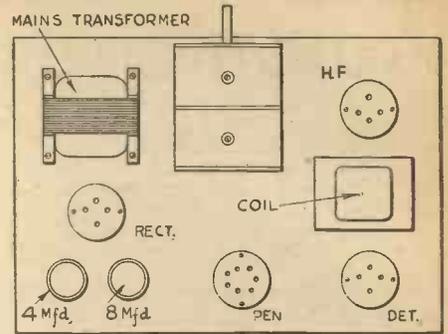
A suggested layout, showing how the mains equipment is located to one side of the chassis away from the coil.
